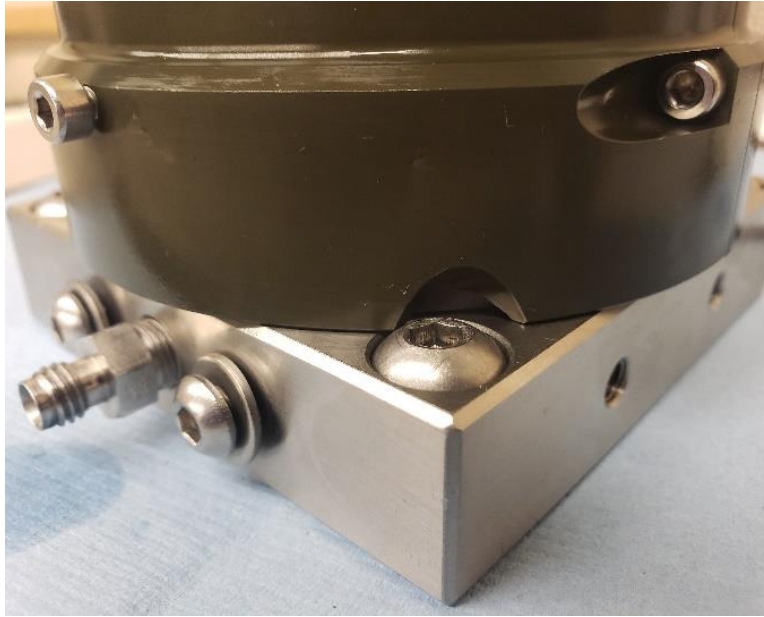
View of the opening at the corners of the base pedestal. Red O-ring should not be visible from this angle.
